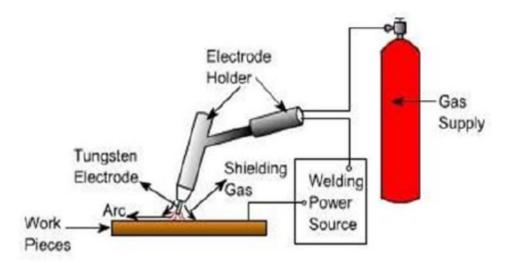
Schematic Diagram of TIG Welding System (Reference 1)
